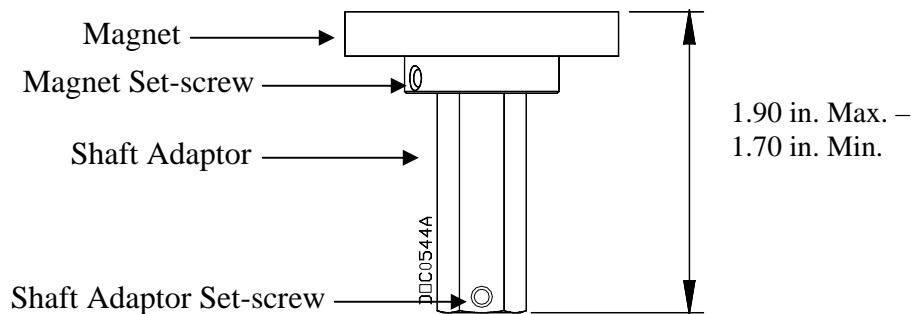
Magnet Installed on Long Shaft Adaptor
